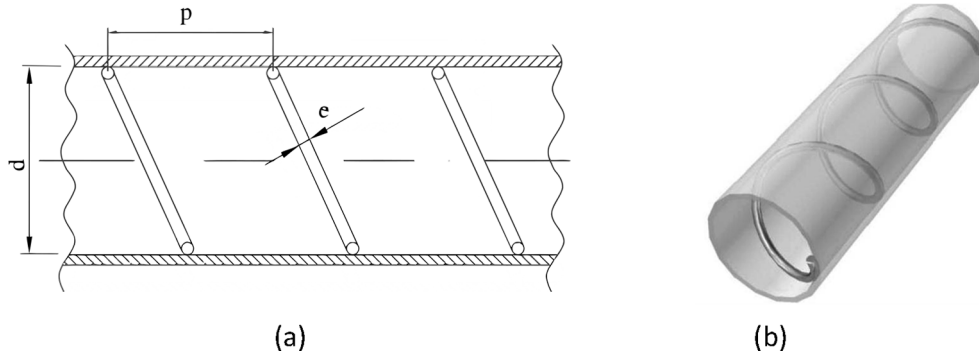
(a) Wire Coil Geometry. (b) Sketch of a wire coil inserted inside a smooth tube.
